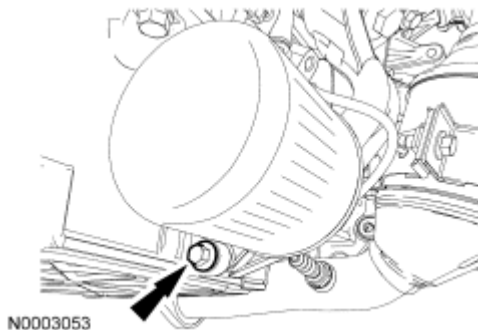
Locating Oil Pan-To-Oil Filter Adapter Bolt
